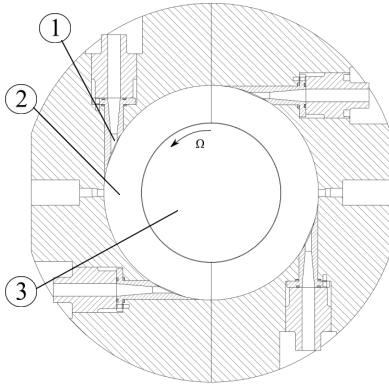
Cross section of the seal house at the inlet cavity section. ① inlet injection nozzle, ② inlet cavity, ③ shaft. The figure is adapted from [31]
